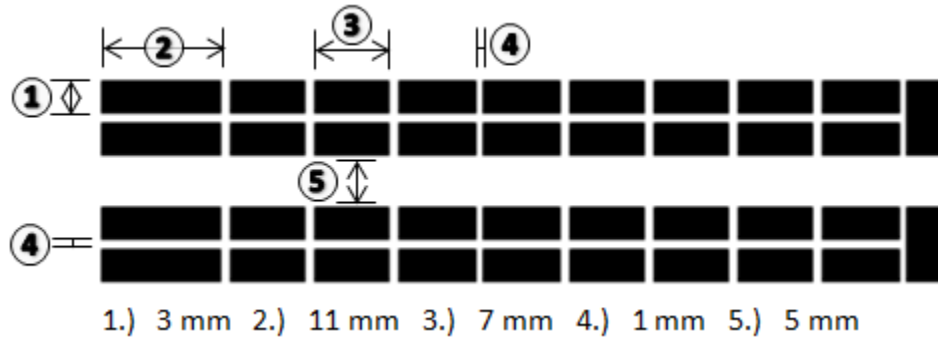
Gap and trace dimensions for the bottom circuit board etch mask
